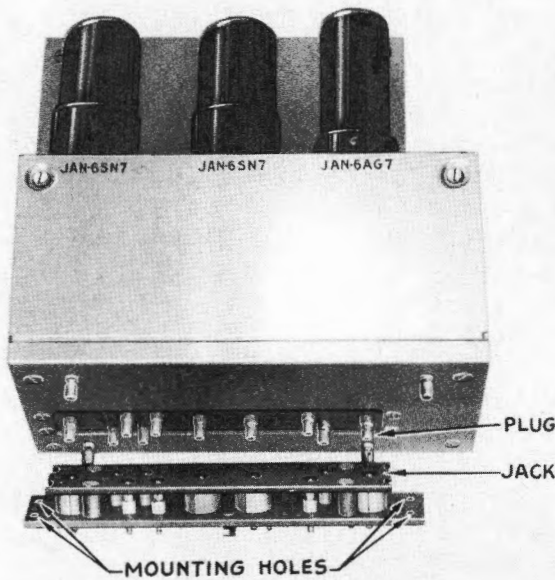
Unit Plug and Jack Connectors—Jack Removed from Chassis
